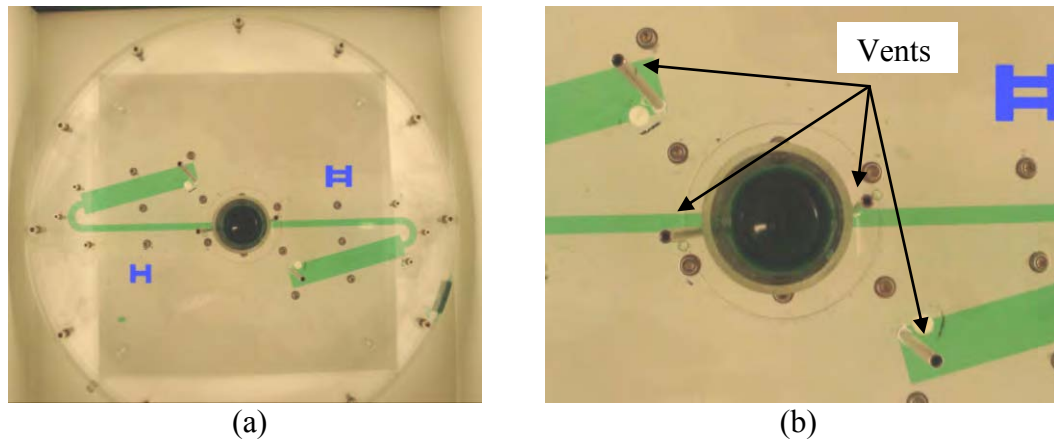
24. Assembly for (a) modified indirect gated mould and (b) close-up showing position of vents.
